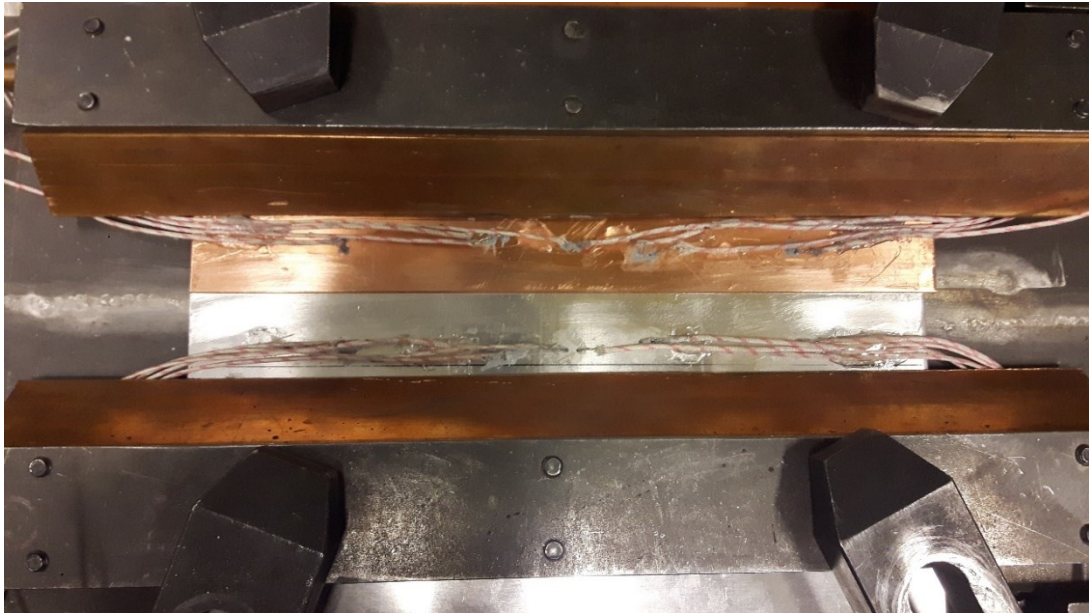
Thermocouples inside clamped base materials before welding
